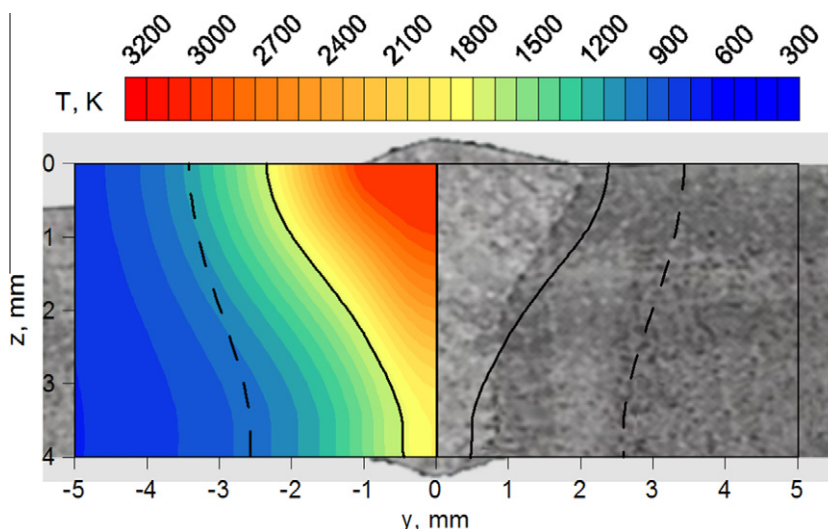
Cross section of hybrid welded joint with marked calculated melted zone and HAZ.
